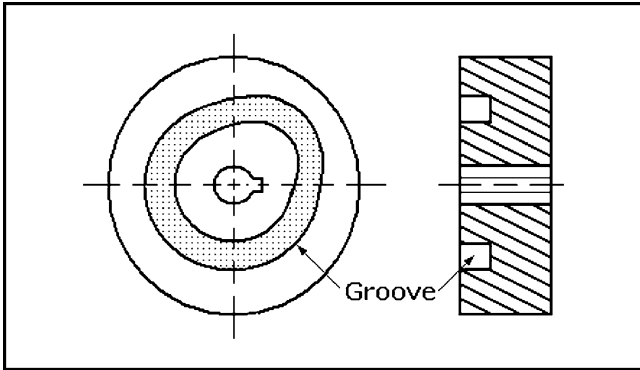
Grooved cam made by milling a contoured cam groove into a metal or plastic disk. A roller follower is held within the grooved contour by its depth, eliminating the need for spring-loading.
